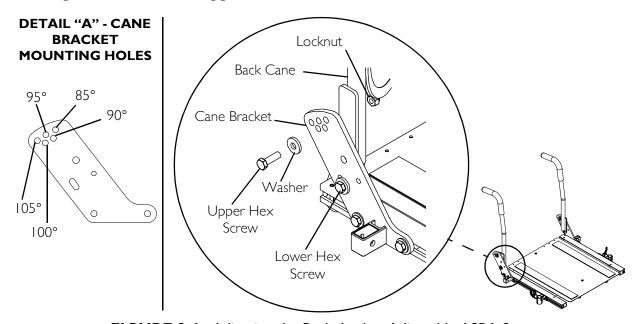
Adjusting the Back Angle - Adjustable ASBA Seats
